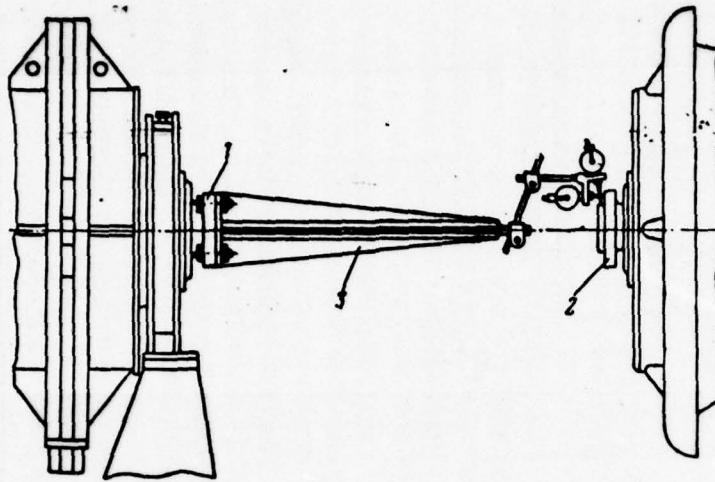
Device for centering of engine with hydraulic brake. 1 - the shaft of hydraulic brake, 2 - the shaft of engine, 3 - device for a centering.
